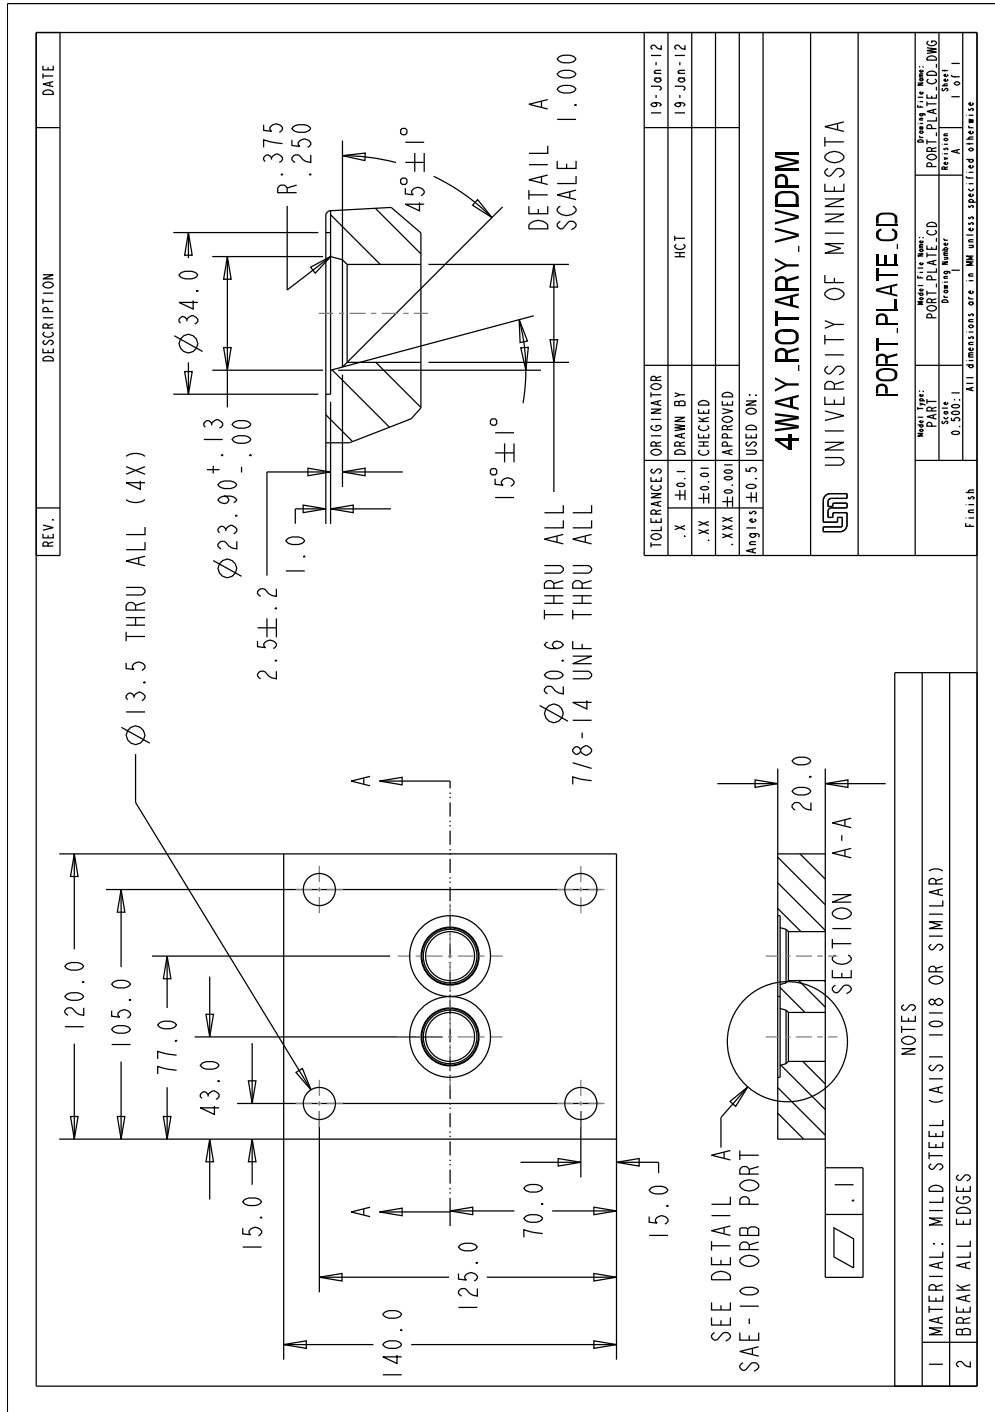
Valve port plate adapter for stand-alone testing (Ports C and D)
